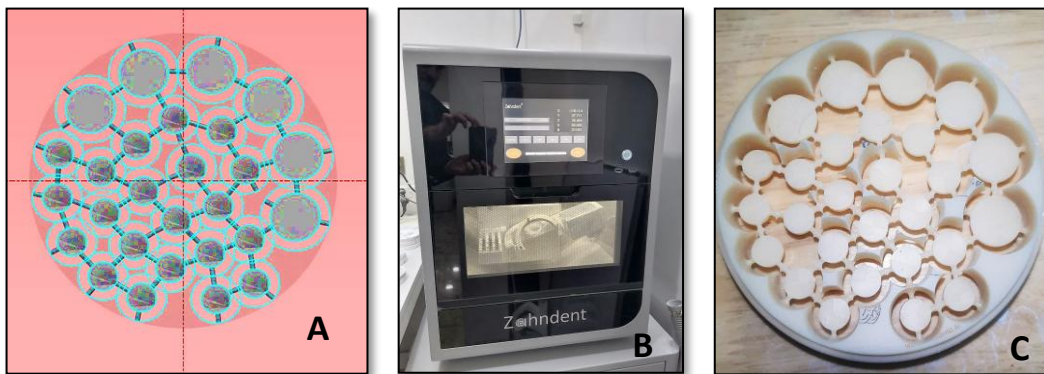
A) Sample design with GO2dental Cam software to be prepared for milling. B) CAD CAM Milling Machine (Zahndent). C) Samples after milling.
